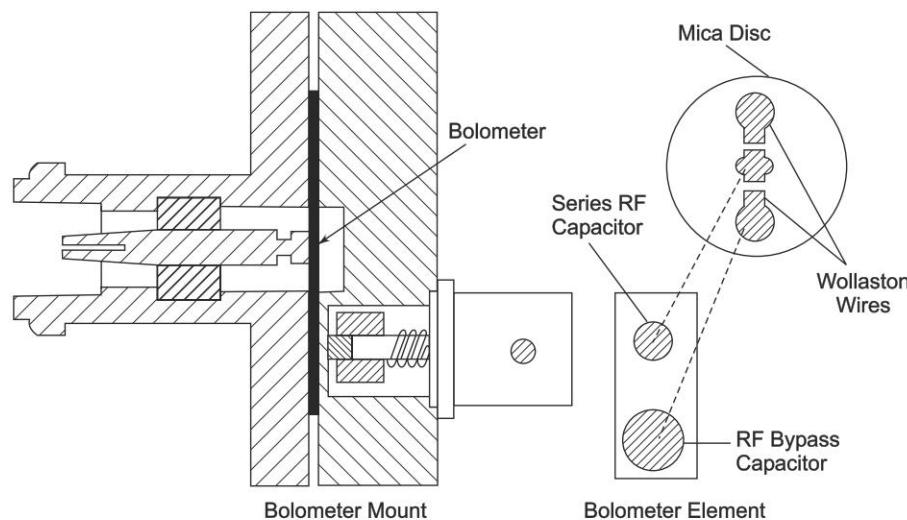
Schematic view of bolometer mount and bolometer element
